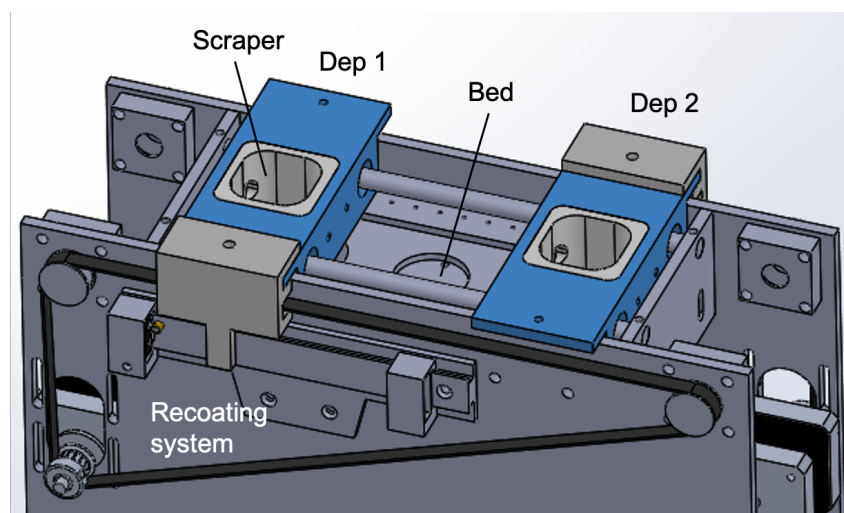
3DMMLPBF machine v2.0: Recoating system (adapted from [178])
